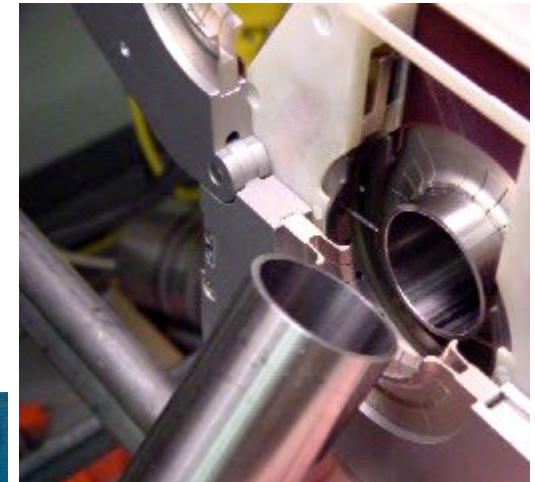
A good machined end-preparation is important for fit-up of the weld joint and for achieving repeatable orbital welds. Photo courtesy of Arc Machines, Inc.
